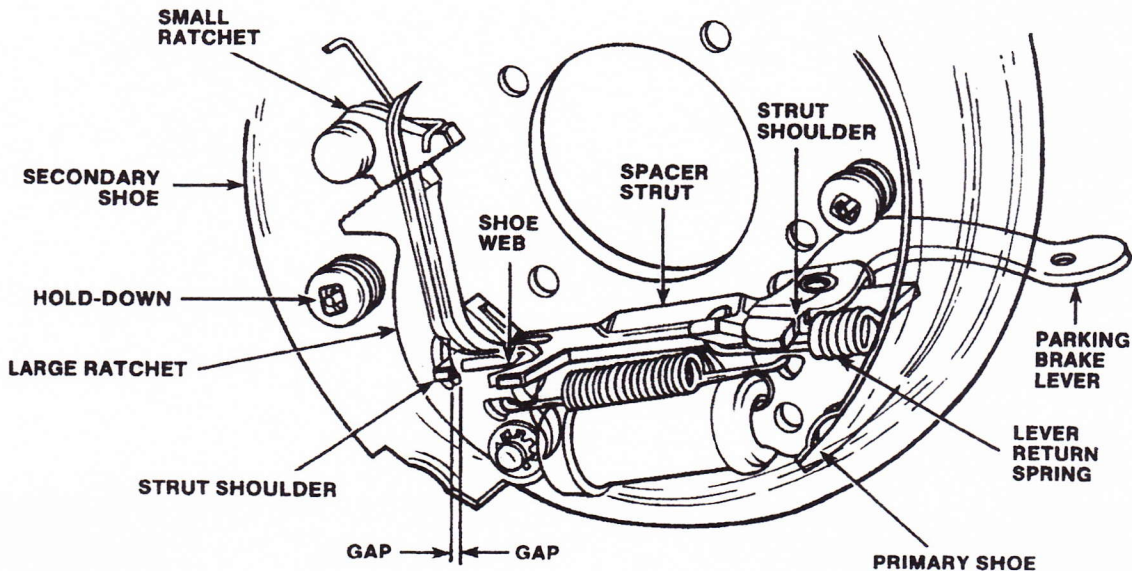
Typical nonservo self-adjusting mechanism.
